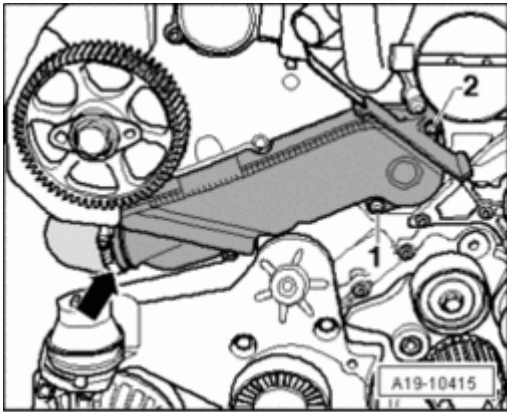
Removing Coolant Hose From Coolant Thermostat Housing, Bolts & Coolant Thermostat Housing
